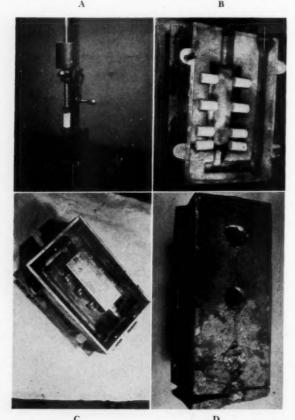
(A) 11/8-in. Rammer; (B) Mold with Cores in place; (C) Assembled Flask and Pattern; (D) Brass Casting.
